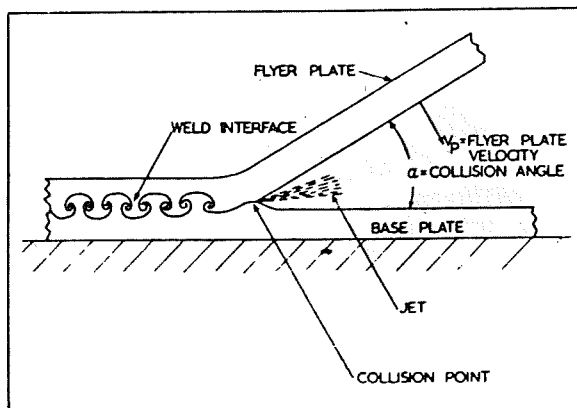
Schematic diagram of the parallel plate welding configuration.
